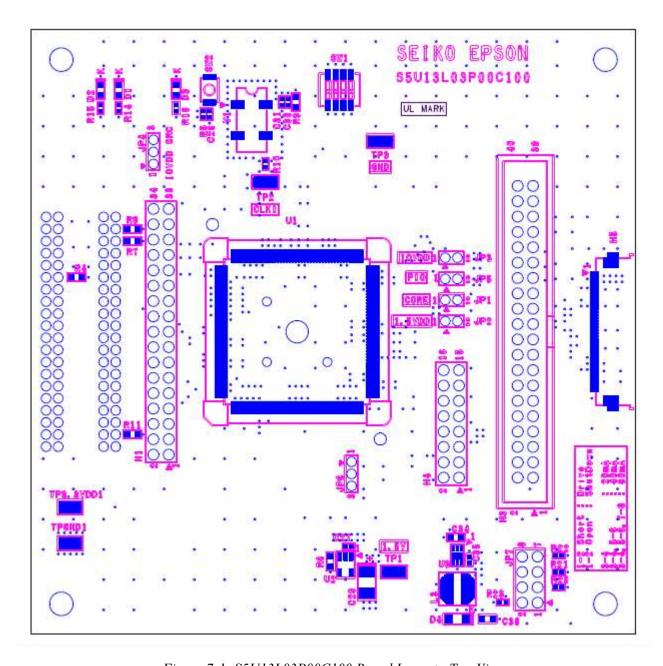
S5U13L03P00C100 Board Layout - Top View
